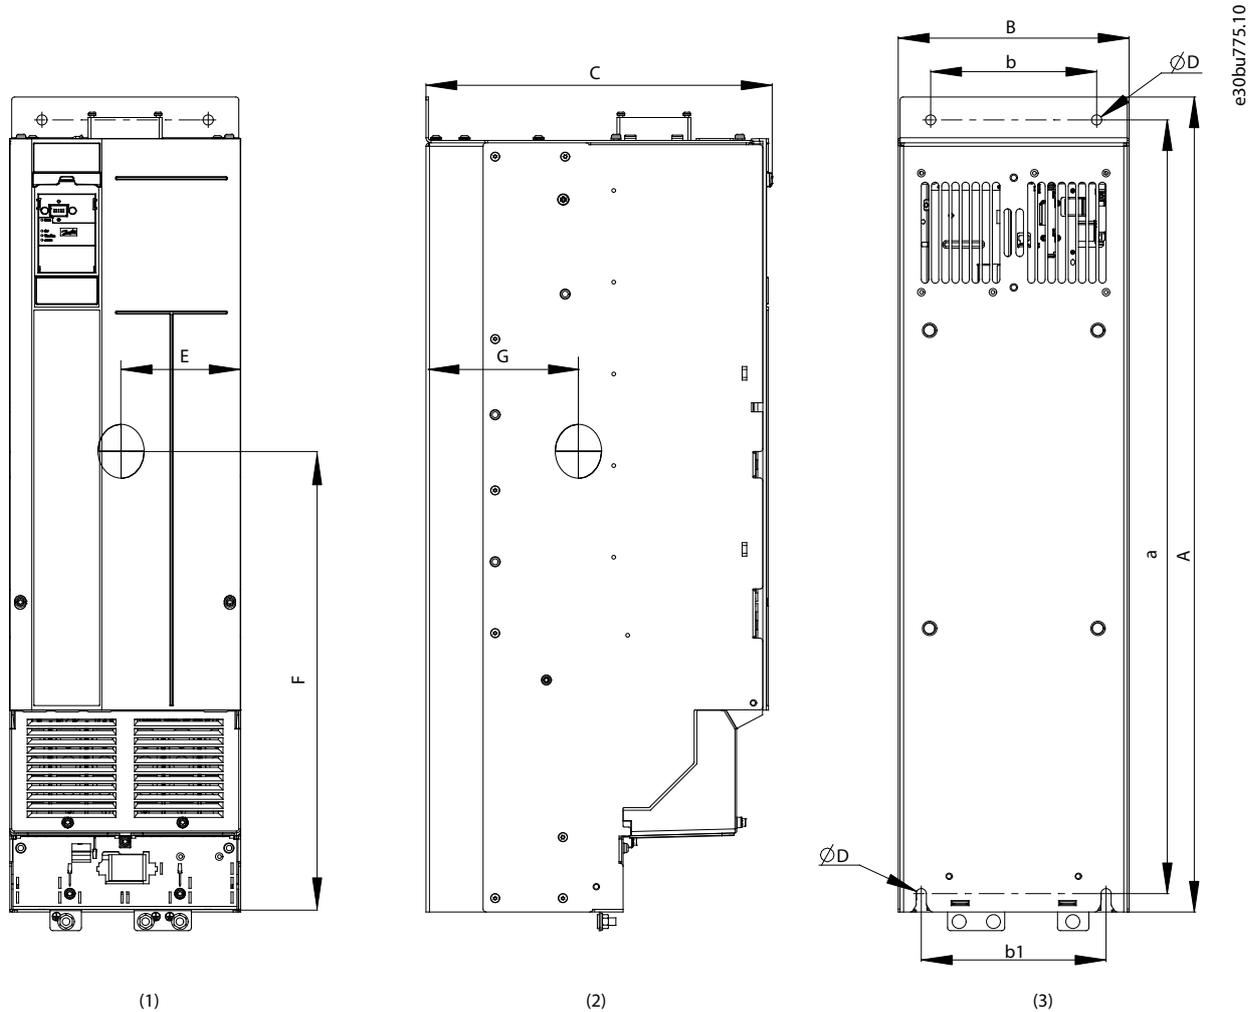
Dimensions, Enclosure Sizes H13–H14
